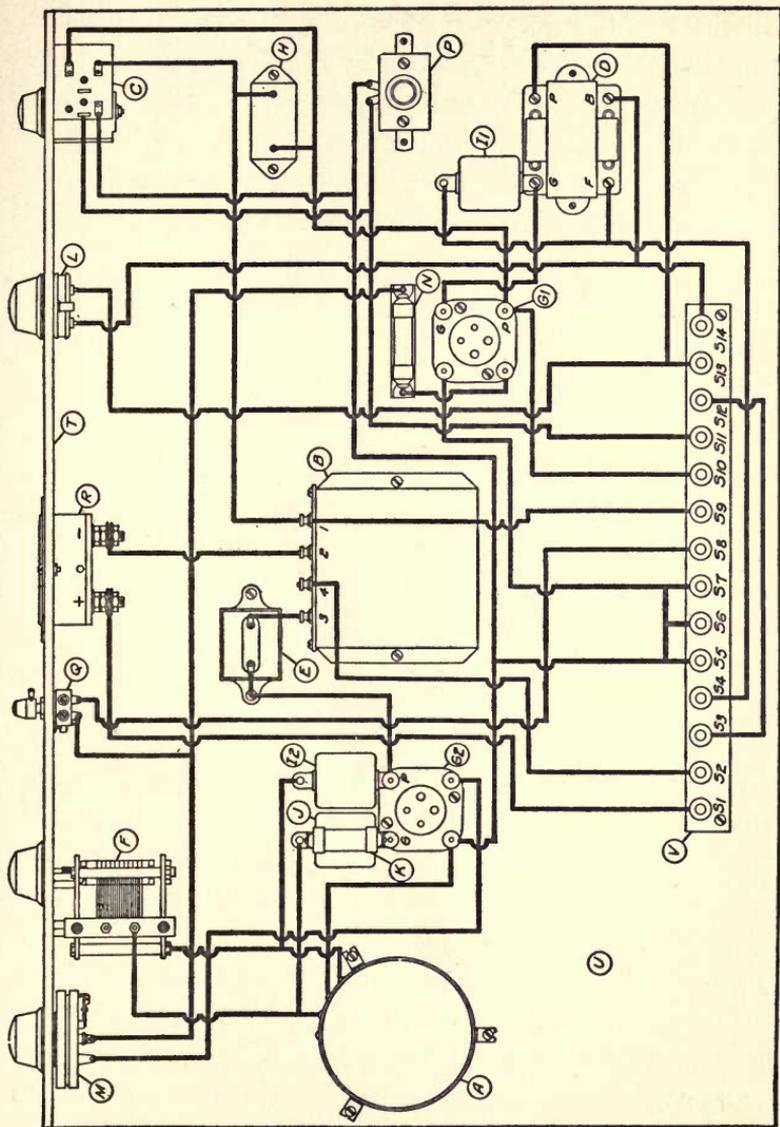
Layout and connection necessary for a receiver of the Cooley type. At A there is shown the "corona coil" which generates the high-voltage used in exposing the photo-sensitive paper wound upon the receiving cylinder.
